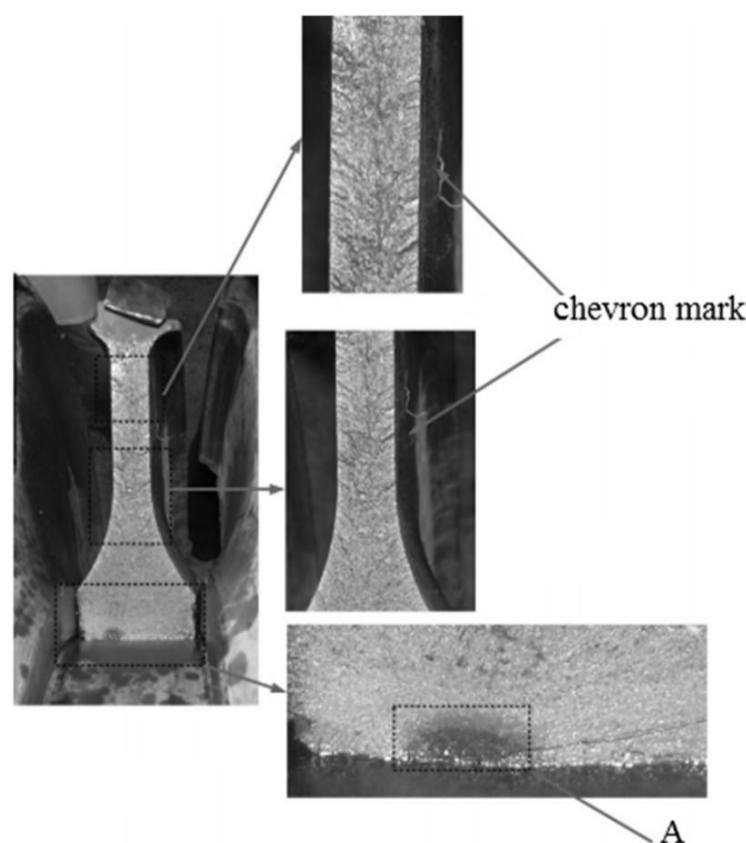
The fracture surface of a turbine disk [1]
